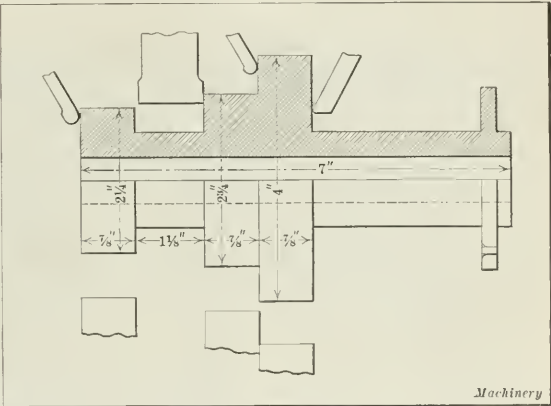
Diagram of Tooling for Three-step Counter Gear
